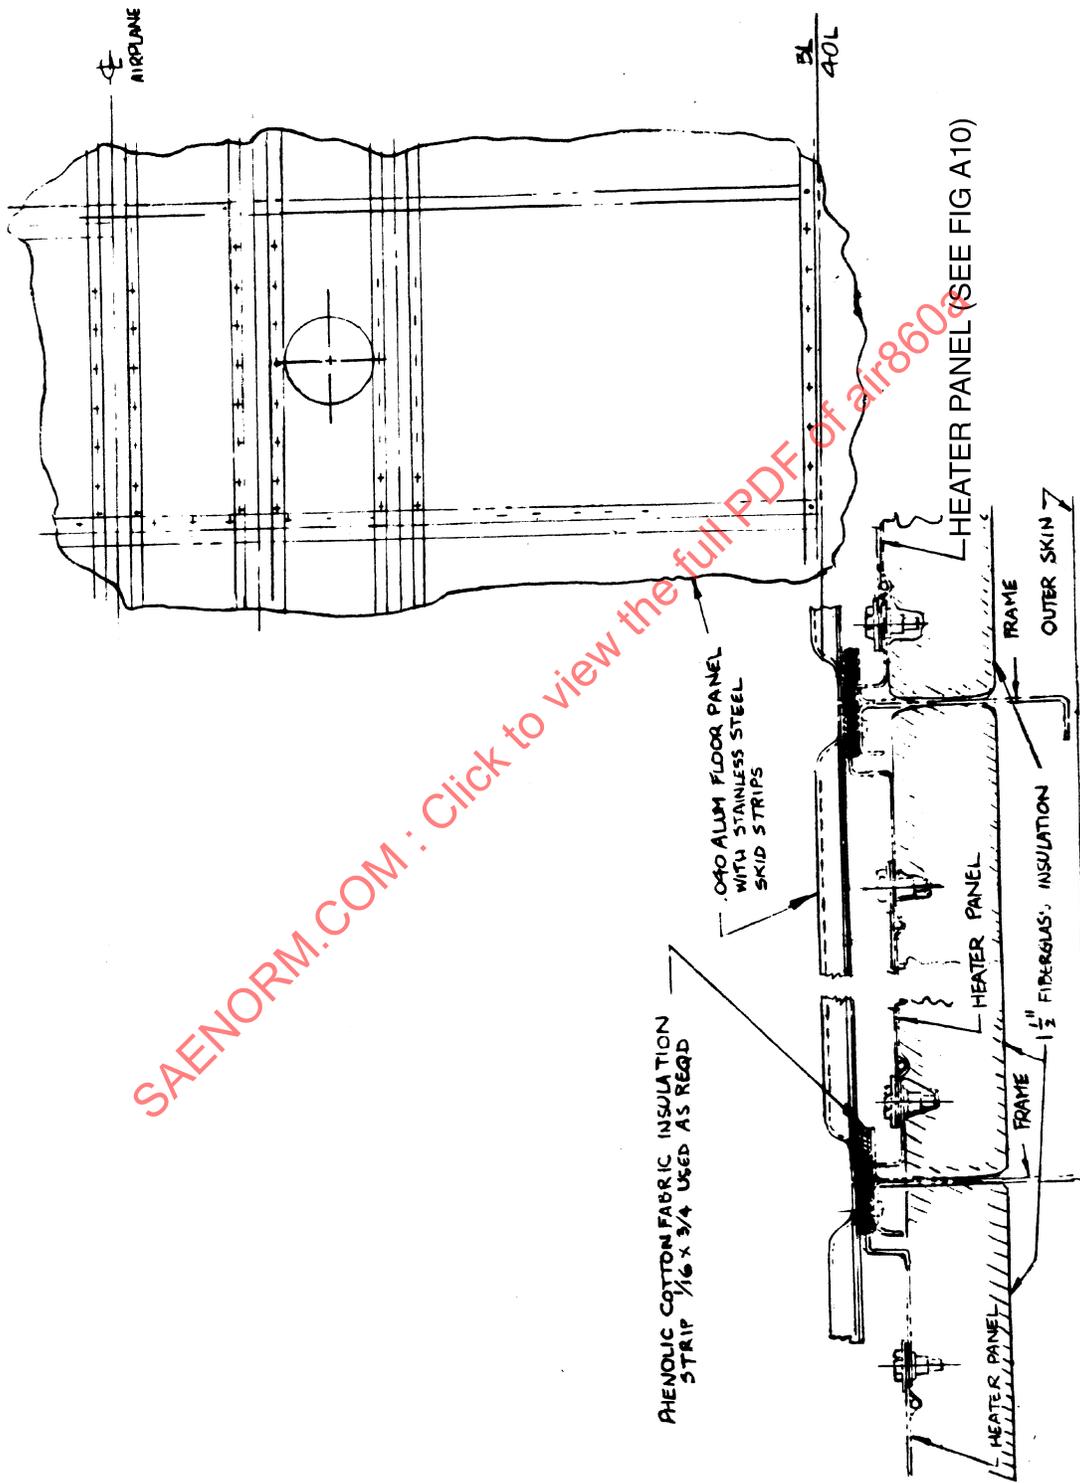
Cargo Compartment Floor and Radiant Panel Installation
